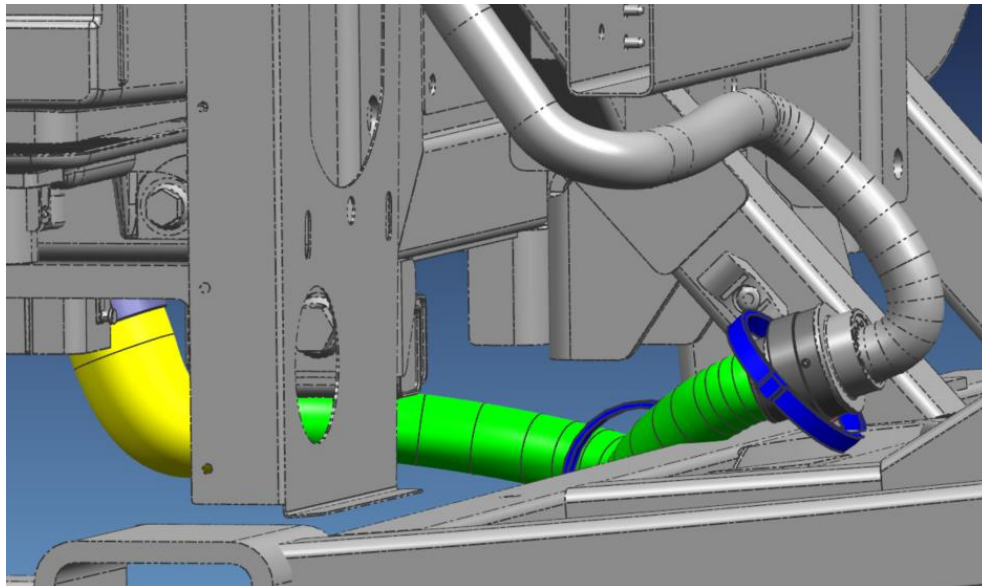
securement of original EC-BATxx connector to jumper harness (top view)
